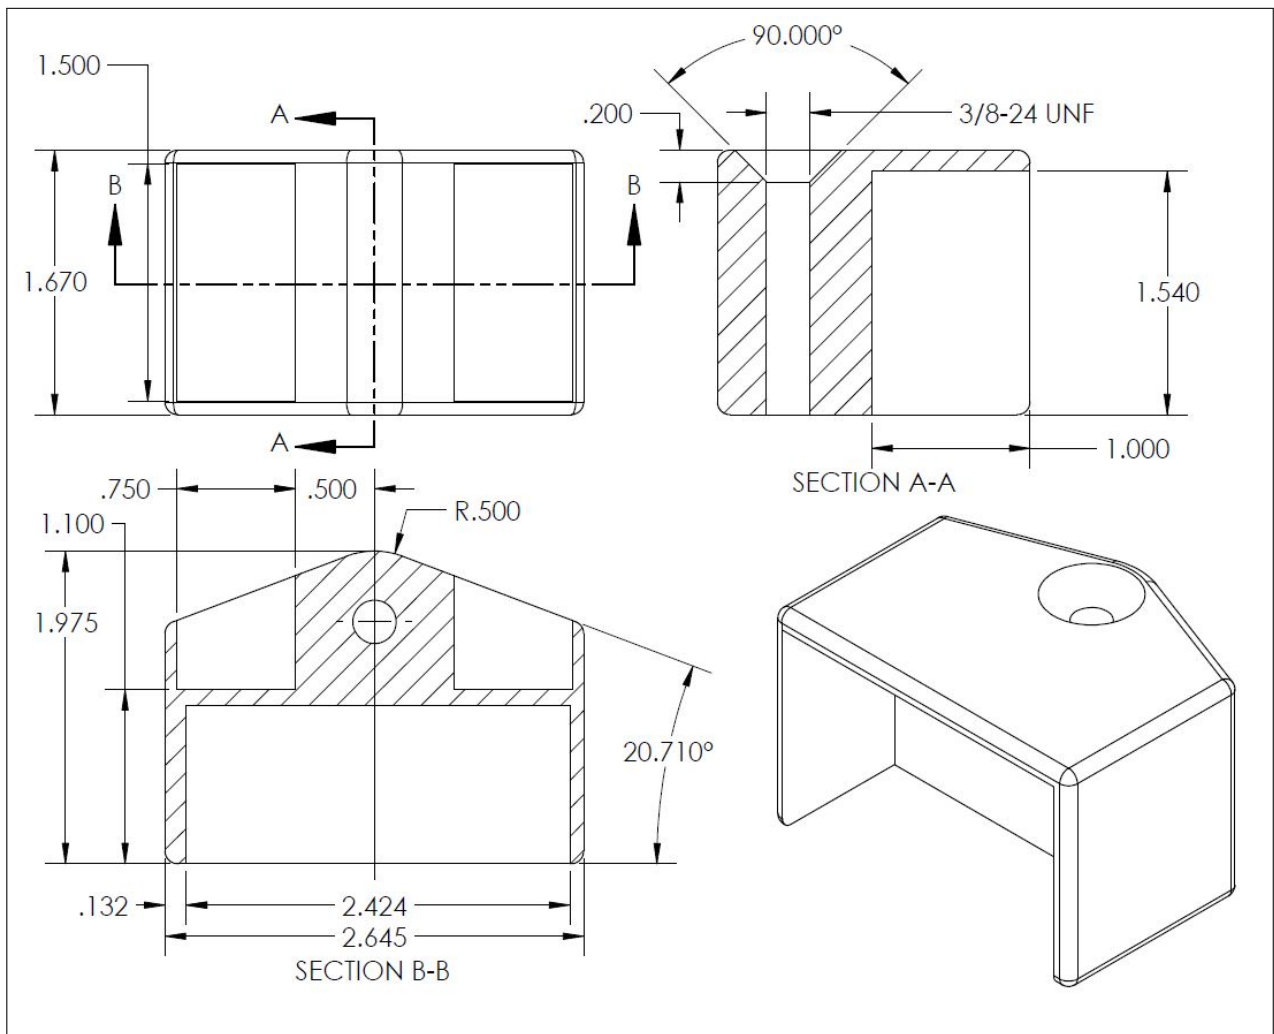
Force Input Device - Interface Block Detail. Material: Aluminum. UNLESS OTHERWISE SPECIFIED, ALL DIMENSIONS ARE IN INCHES.
